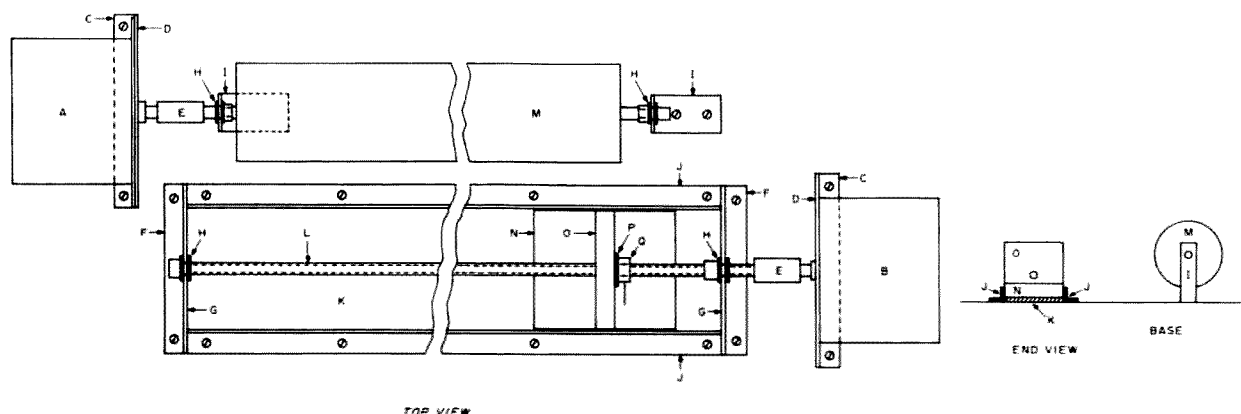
The facsimile recorder mechanical assembly. A—Drum motor; B—traverse motor; C—motor mounting plate angle bracket; D—motor mounting plate; E—rubber-tubing shaft coupling; F—drive-rod support plate angle bracket; G—drive-rod support plate; H— $3/8''$ panel bushing; I—drum support bracket; J—carriage track bracket; K—glass-plate track surface; L— $1/4$ -20 threaded drive rod; M—drum assembly; N—stylus-carriage base; O—stylus support; P—carriage-drive washer, and Q— $1/4$ -20 carriage-drive nut.
